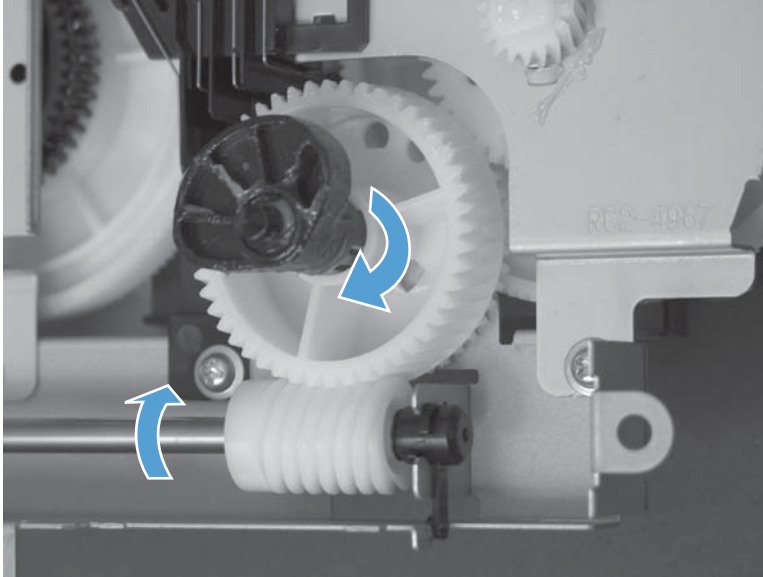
Reinstall the main drive assembly (2 of 11)
